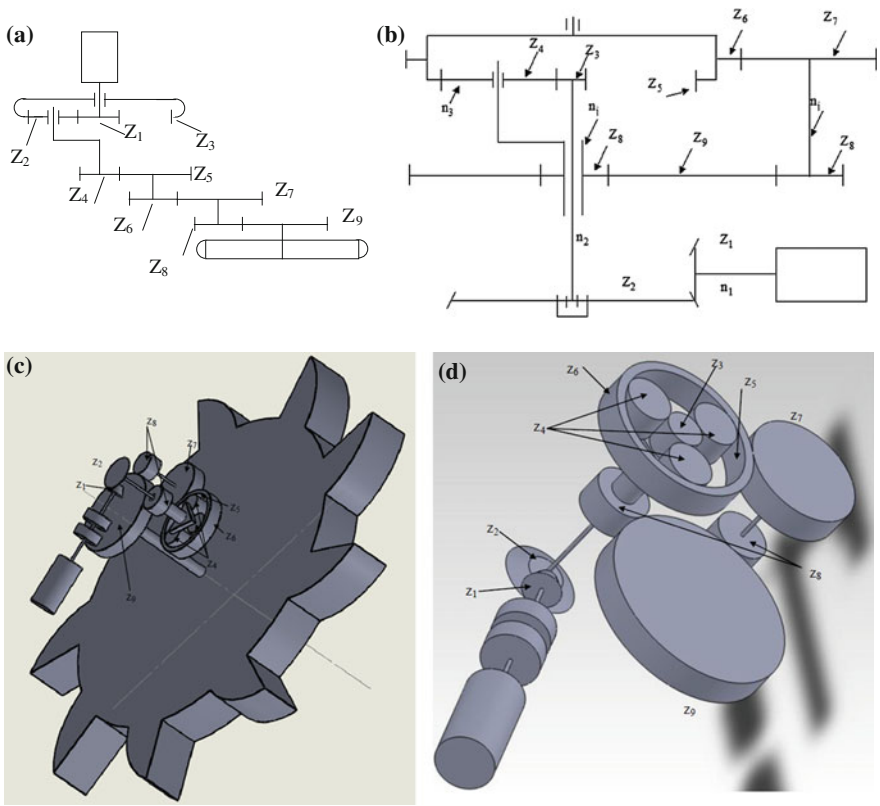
Two schemes (a) and (b) of different designs of driving systems, (c) and (d) more details for driving system (b), in (d) bucked wheel is neglected
